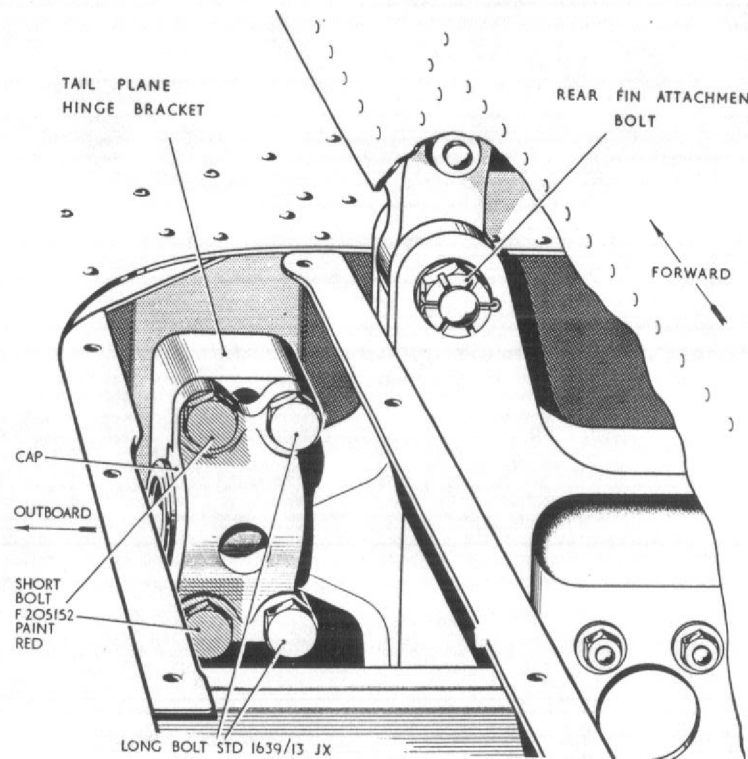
Rear fin attachment and tail plane hinge bracket and cap
